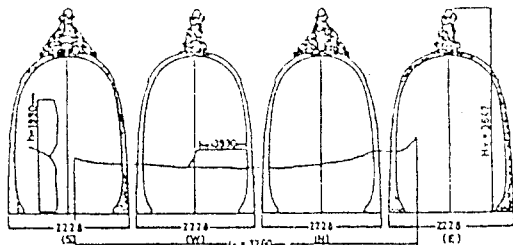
Propagated crack length of Boshingak old bell (S : Southm, W : West, N : North, E : East)
